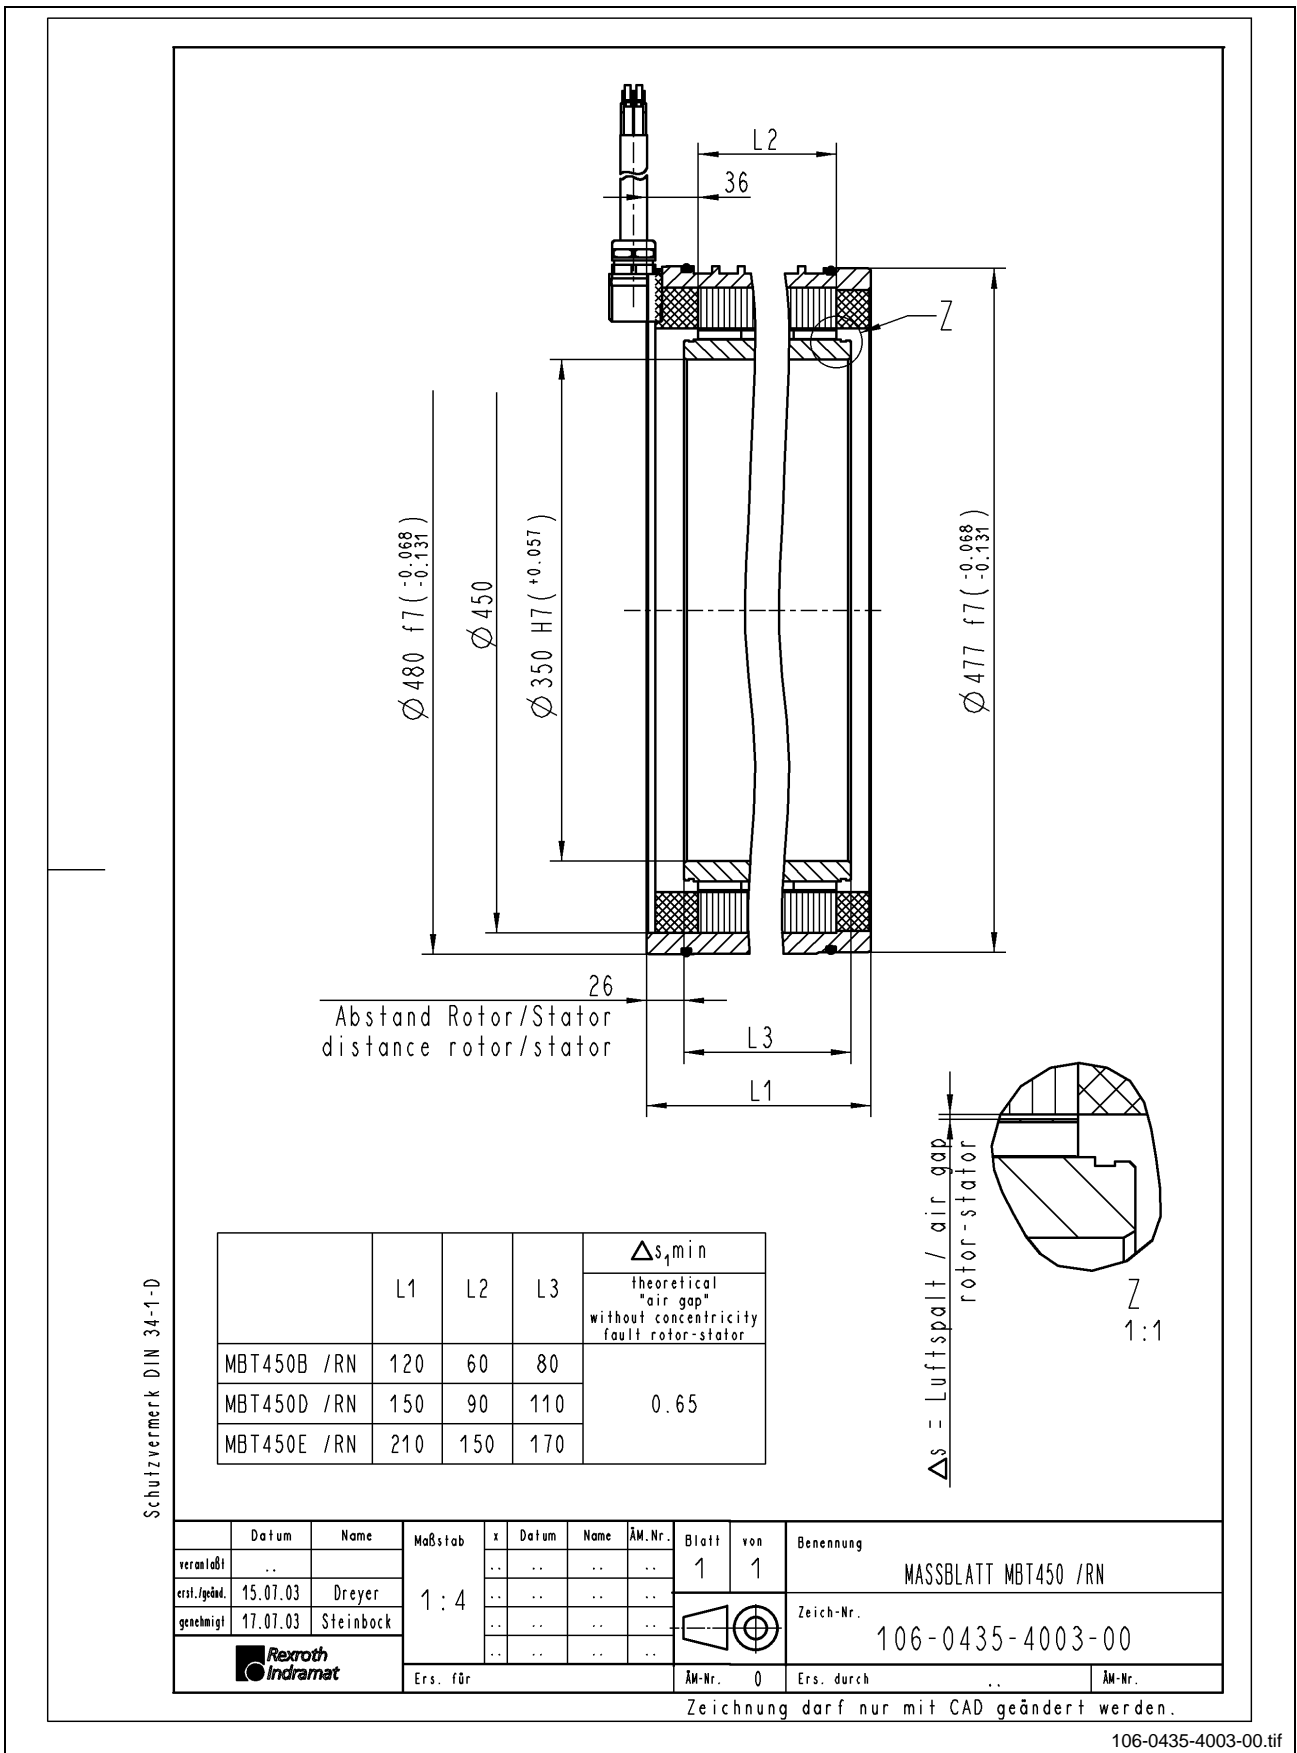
Dimension sheet size 450, electrical connection "RN"
